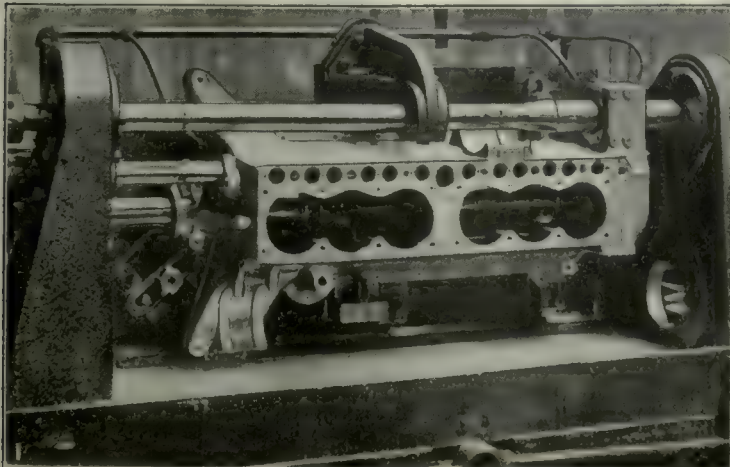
FINISH BORING MARMON CRANKCASE. FIG. 2—THE BORING BAR AND DIAMOND TOOLS USED
